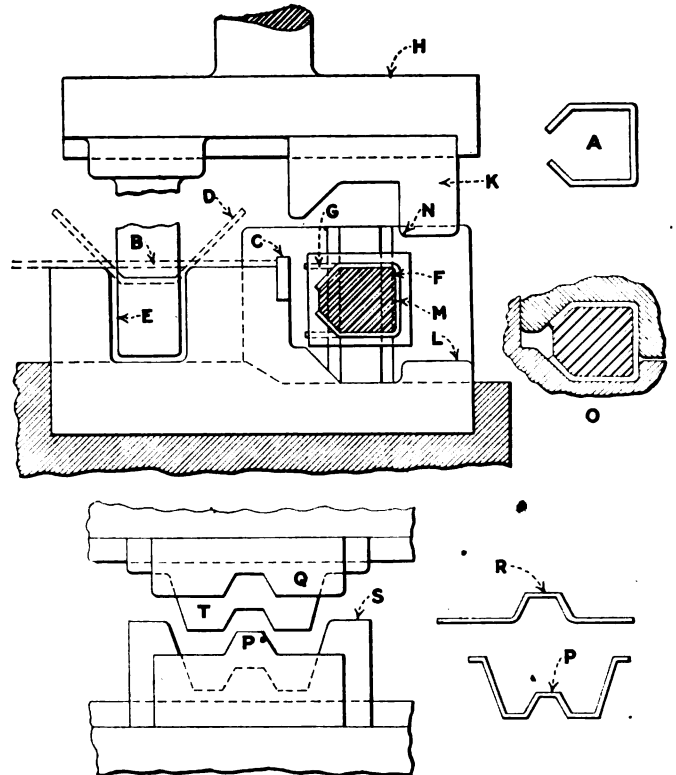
TWO EXAMPLES OF DOUBLE BENDING DIES
